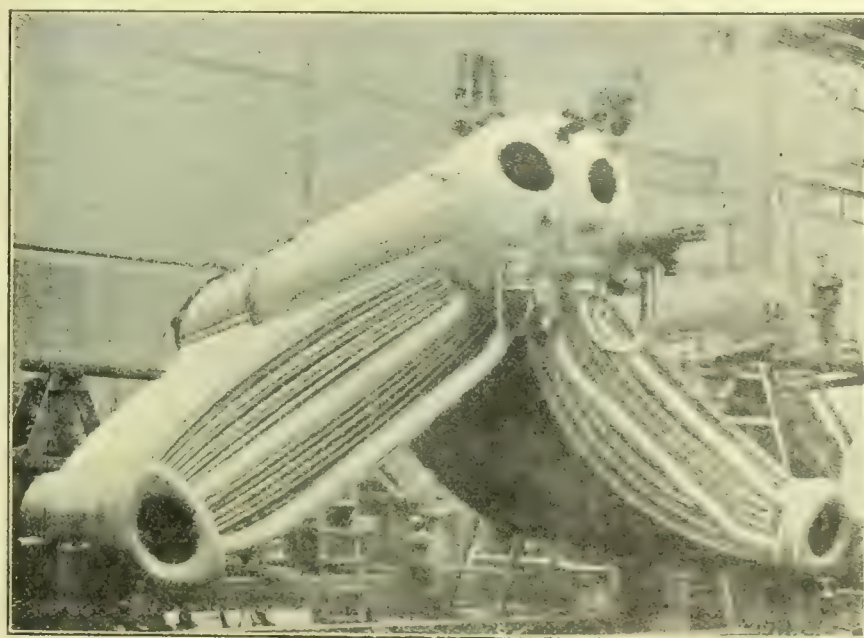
COAL-BURNING BOILER OF 110 SQ. FT. GRATE.
